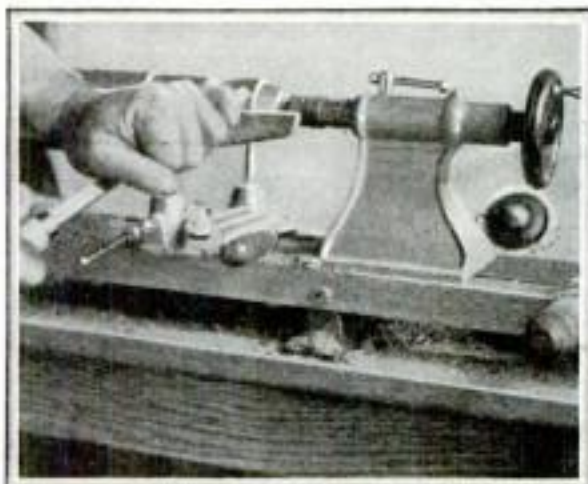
In making a paring cut with a skew, the tool is held at an angle to the surface.
